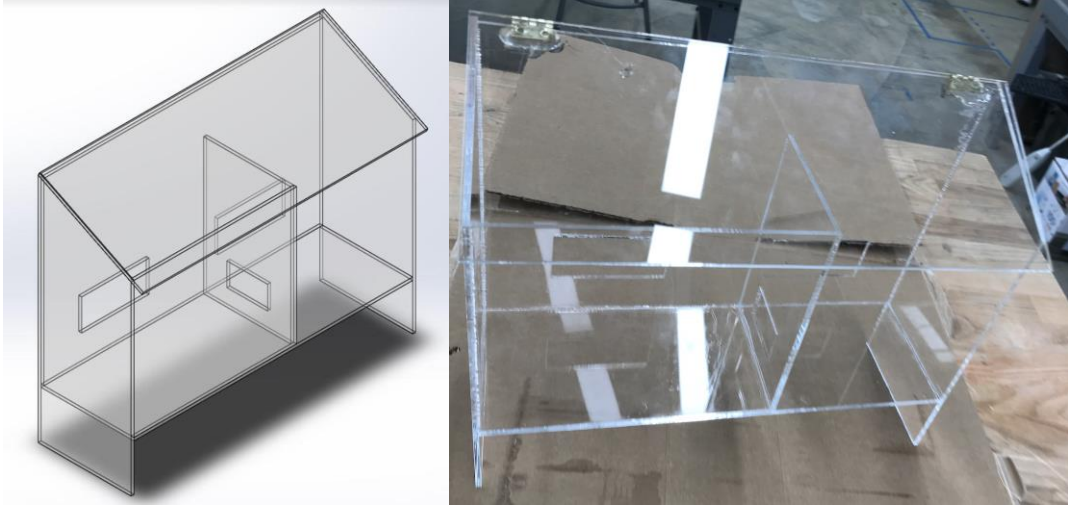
CAD model and fabricated acrylic space heater enclosure.
